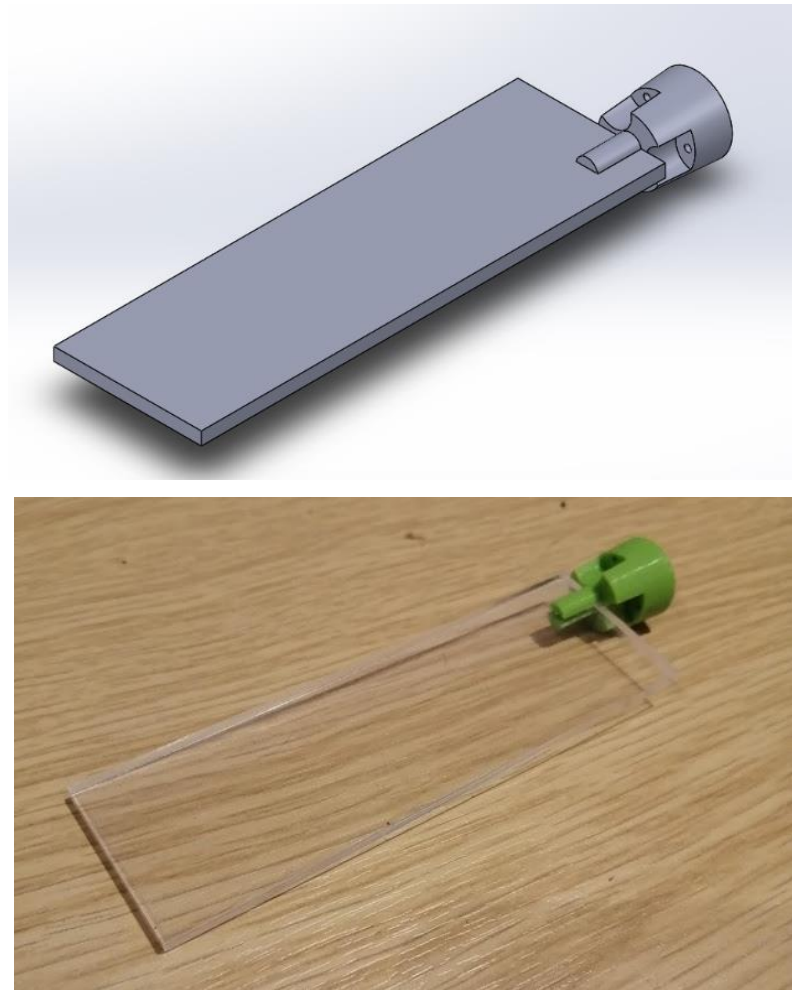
a) CAD of wing and adapter assembly (top), b) Manufactured adapter with acrylic wing (bottom)
